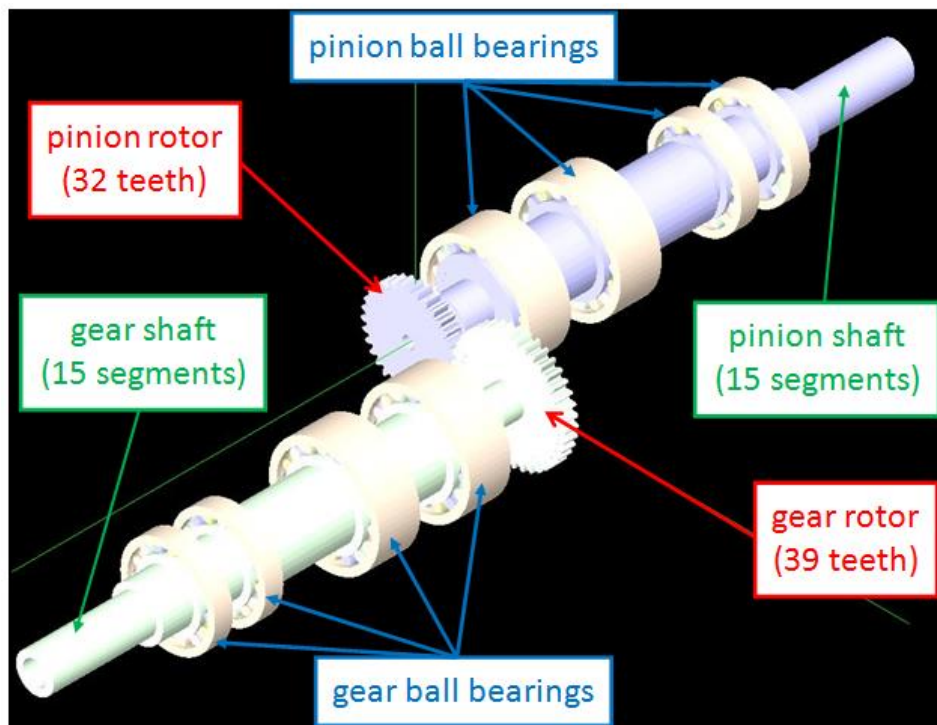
FEM modelling of the mechanical system (pinion, gear, shafts, bearings).
